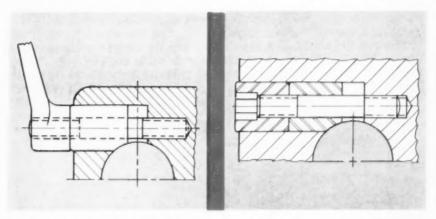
A plain stud threaded at both ends is screwed into hole of casting and jammed.
